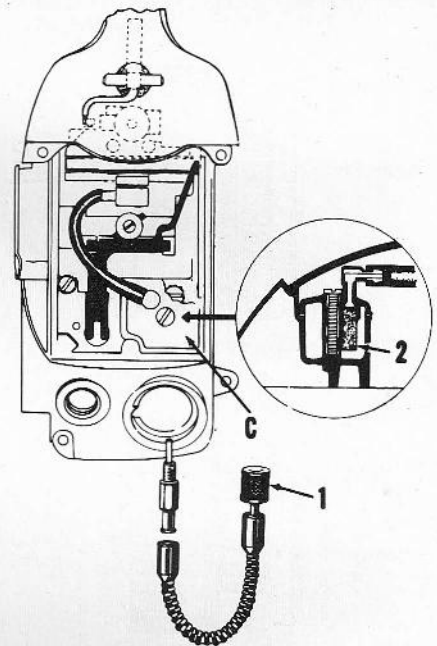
The first fuel filter (1) is located in the tank. Be sure that gasket located under cover (C) doesn't leak, when servicing the second filter (2).
